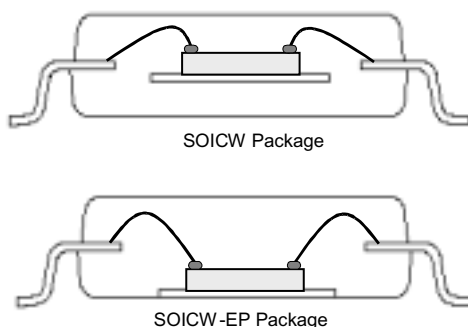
Cross section SOICW Package (Top) & SOICW-EP Package (Bottom)
